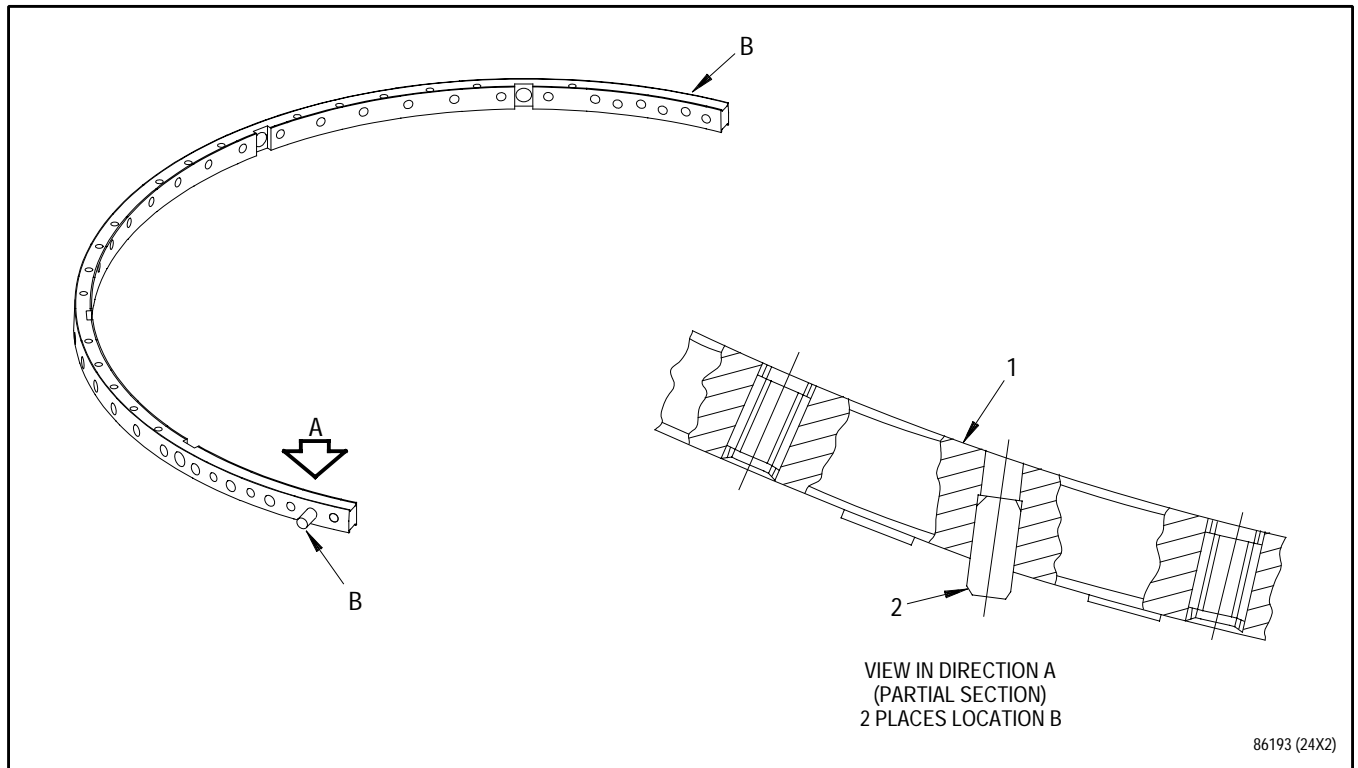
Rear Compressor Inlet Stator Synchronizing Ring Assembly - Pin Replacement
